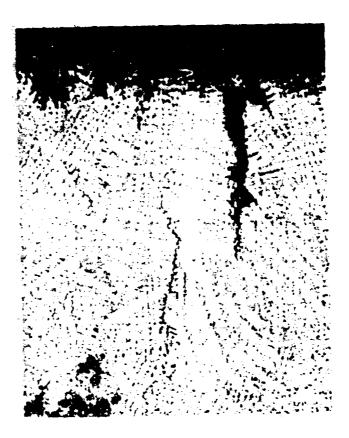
Photomicrograph of Weld Crack and Shrink Porosity in Inconel 718 Weld. The Weld Surface (Top) Shows Interdentritic Attack from Pickling. Magnification 100X
